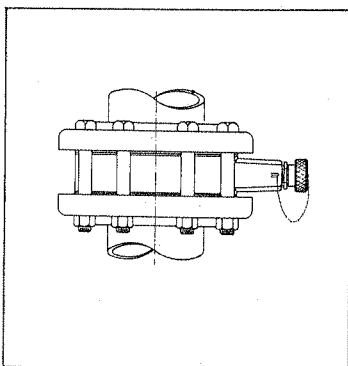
Nos. 742-746 shown between Flanges. Fittings are furnished with bolts, nuts and gaskets but not the flanges.
